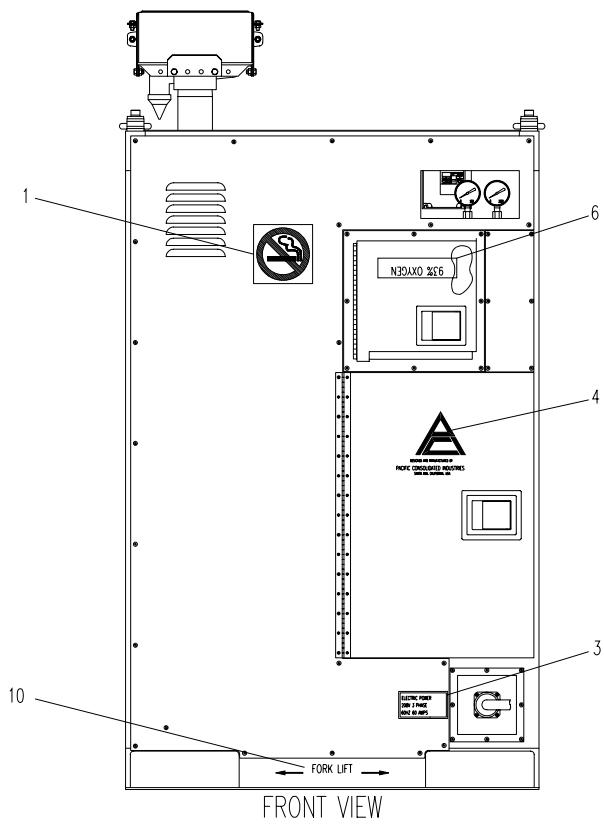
Marking Installation Kit Assembly (sh 2 of 2).
